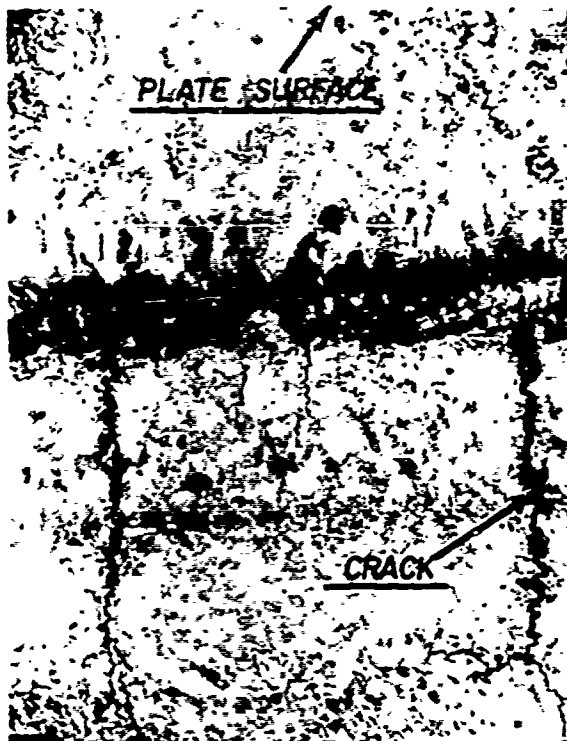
Macrograph of Hydrogen Cross-Cracks obtained in weld metal in PS-10. The section is parallel to the axis of the weld and perpendicular to the surface. Two percent Nital etch, magnification 10X.
